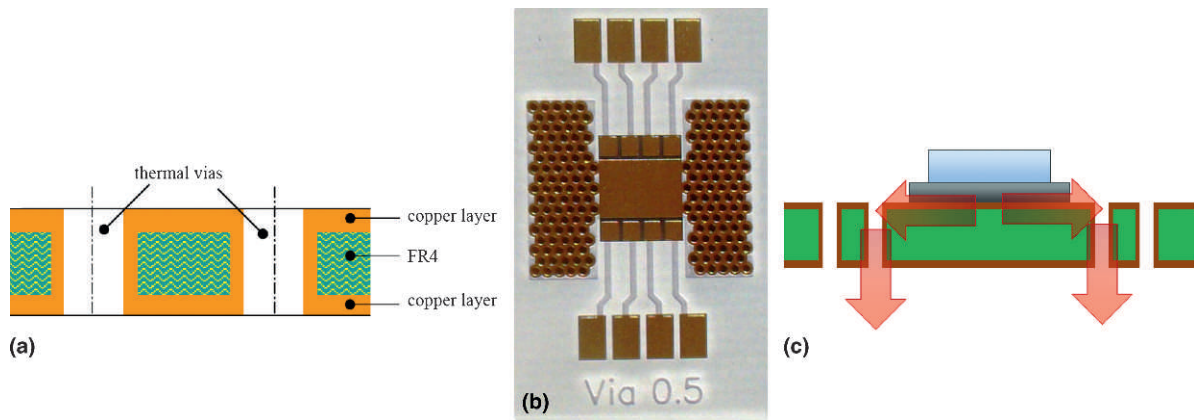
PCB with open thermal vias: (a) schematic; (b) design; and (c) thermal path.
